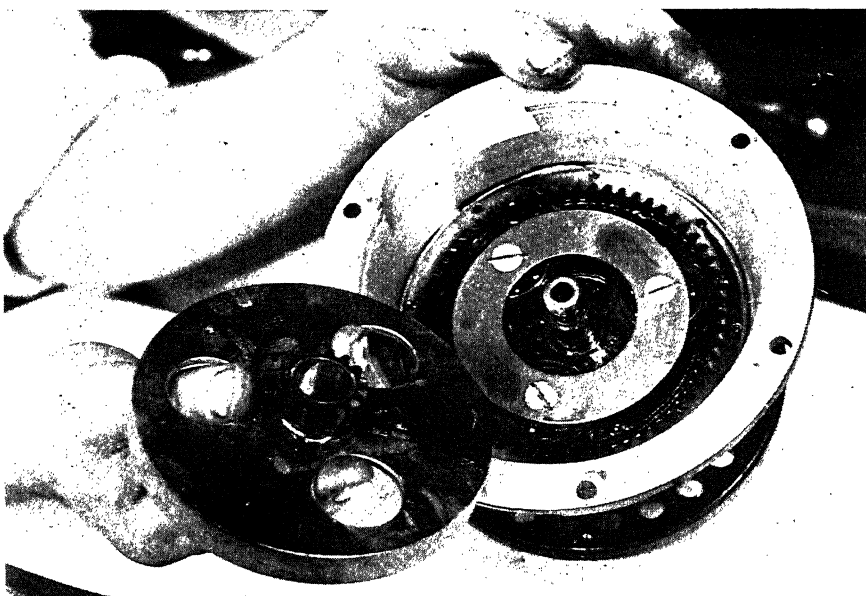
WITHDRAWING THE SUN GEAR FROM ITS HOUSING
